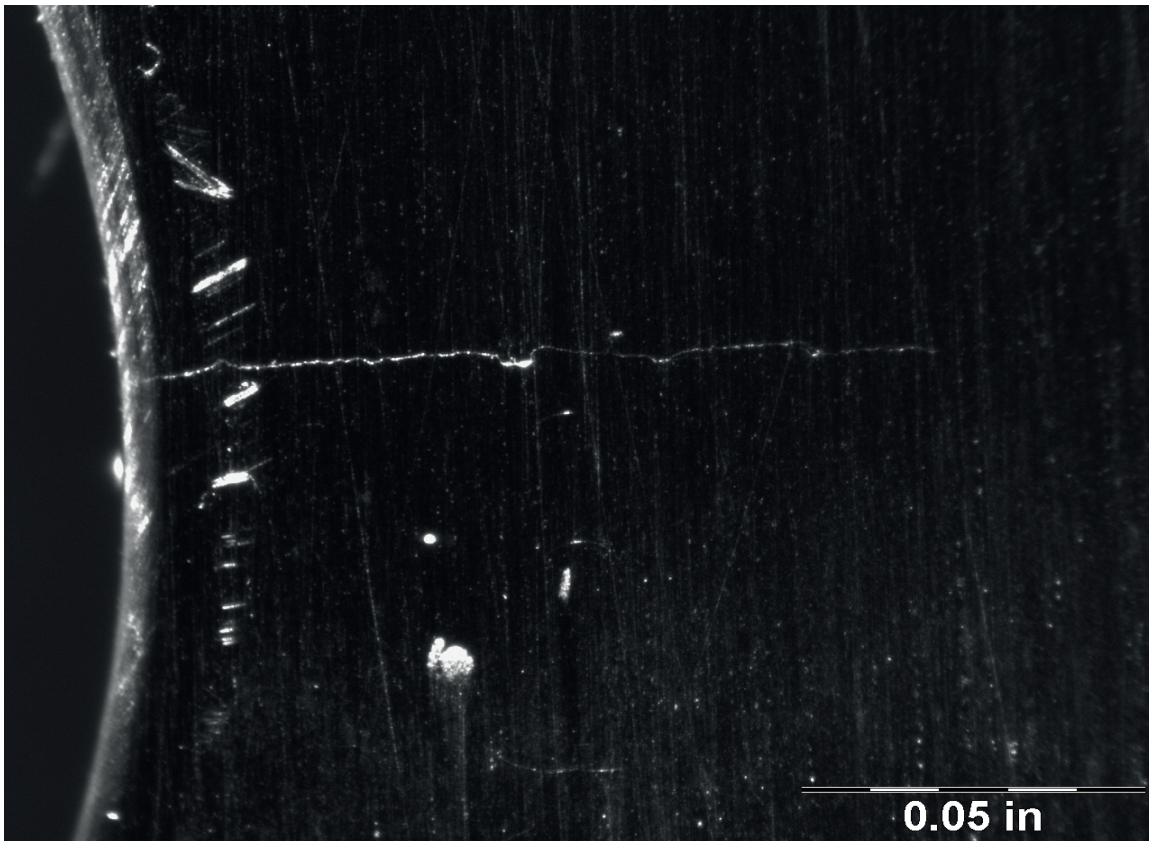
Image of Surface Crack in Coupon Cx4N1-06-D, Surface Crack Length is 0.1235 inch.
